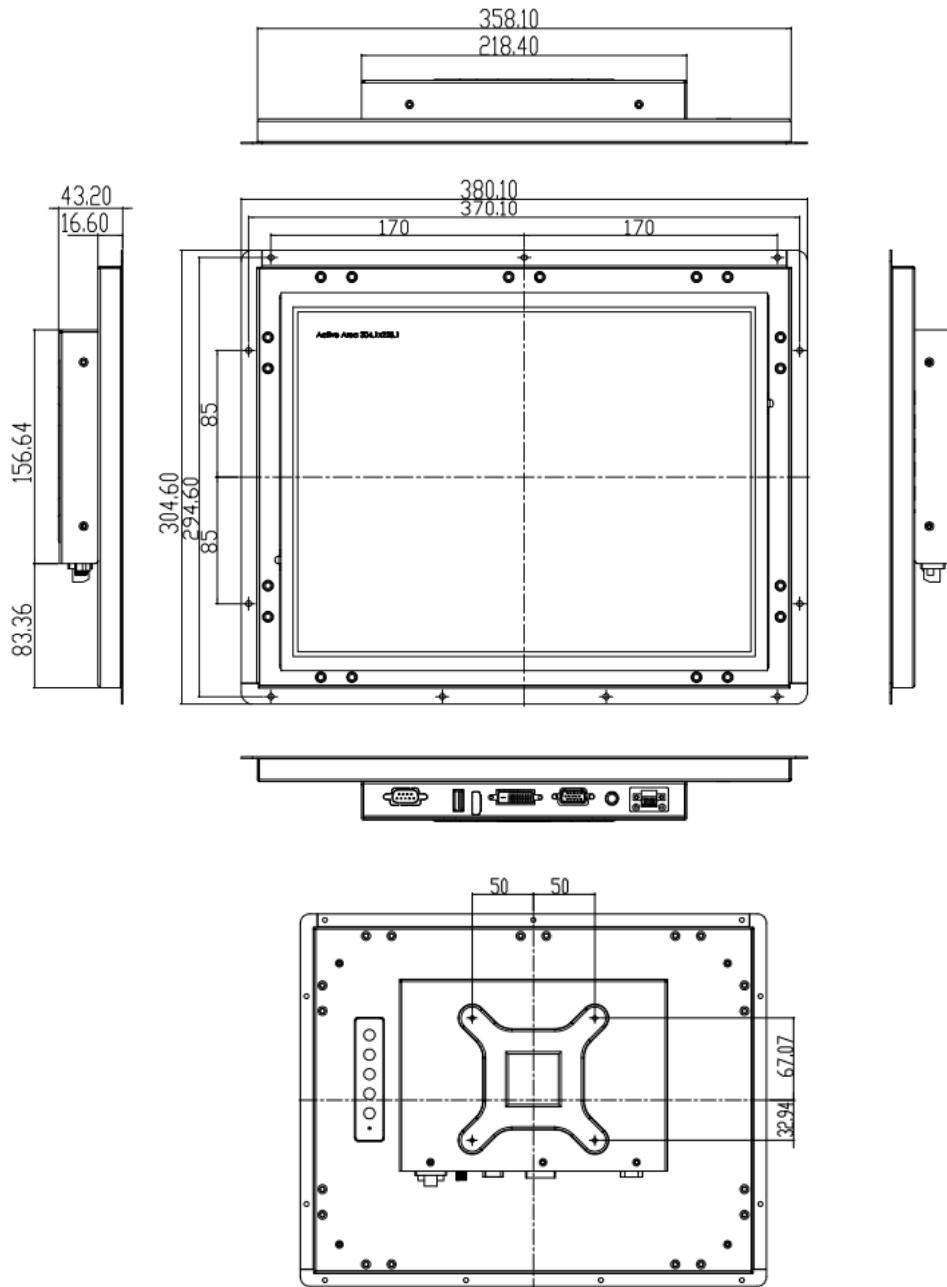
LCD-KIT-F-15A Physical Dimensions (millimeters)
